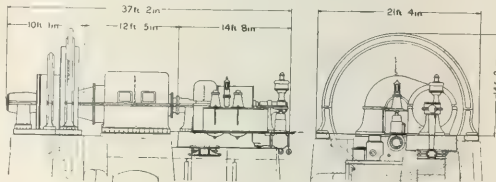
SIDE VIEW AND END VIEW OF TURBO-GENERATOR SET
